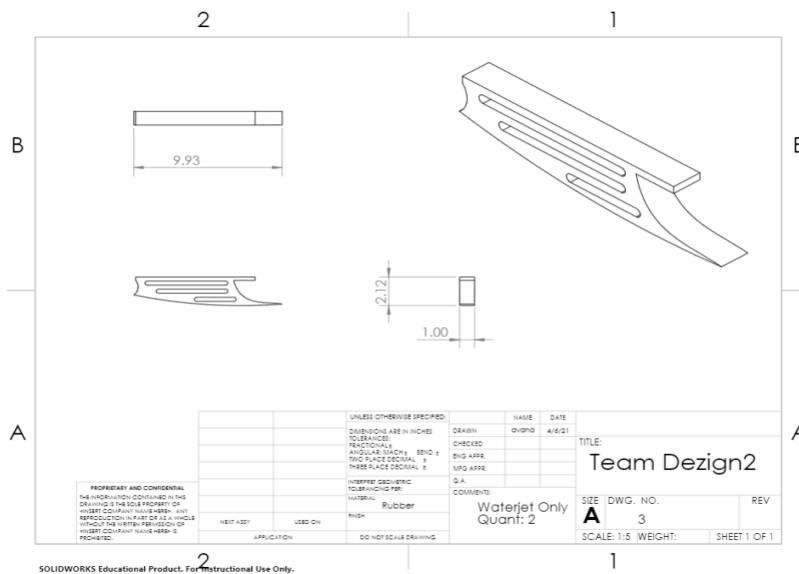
The manufacturing drawing for the *Team Dezn2* prototype. Like the Springblade, it would have been made from two identical rubber pieces that were glued together. This drawing was never approved.
